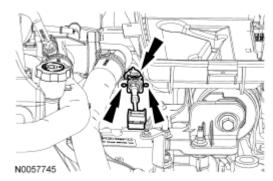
Identifying RH Camshafts Bolts Courtesy of FORD MOTOR CO.
